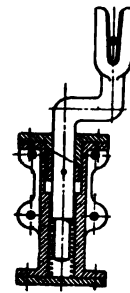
Rope Clip or Jockey used in connection with Rope Haulage.
